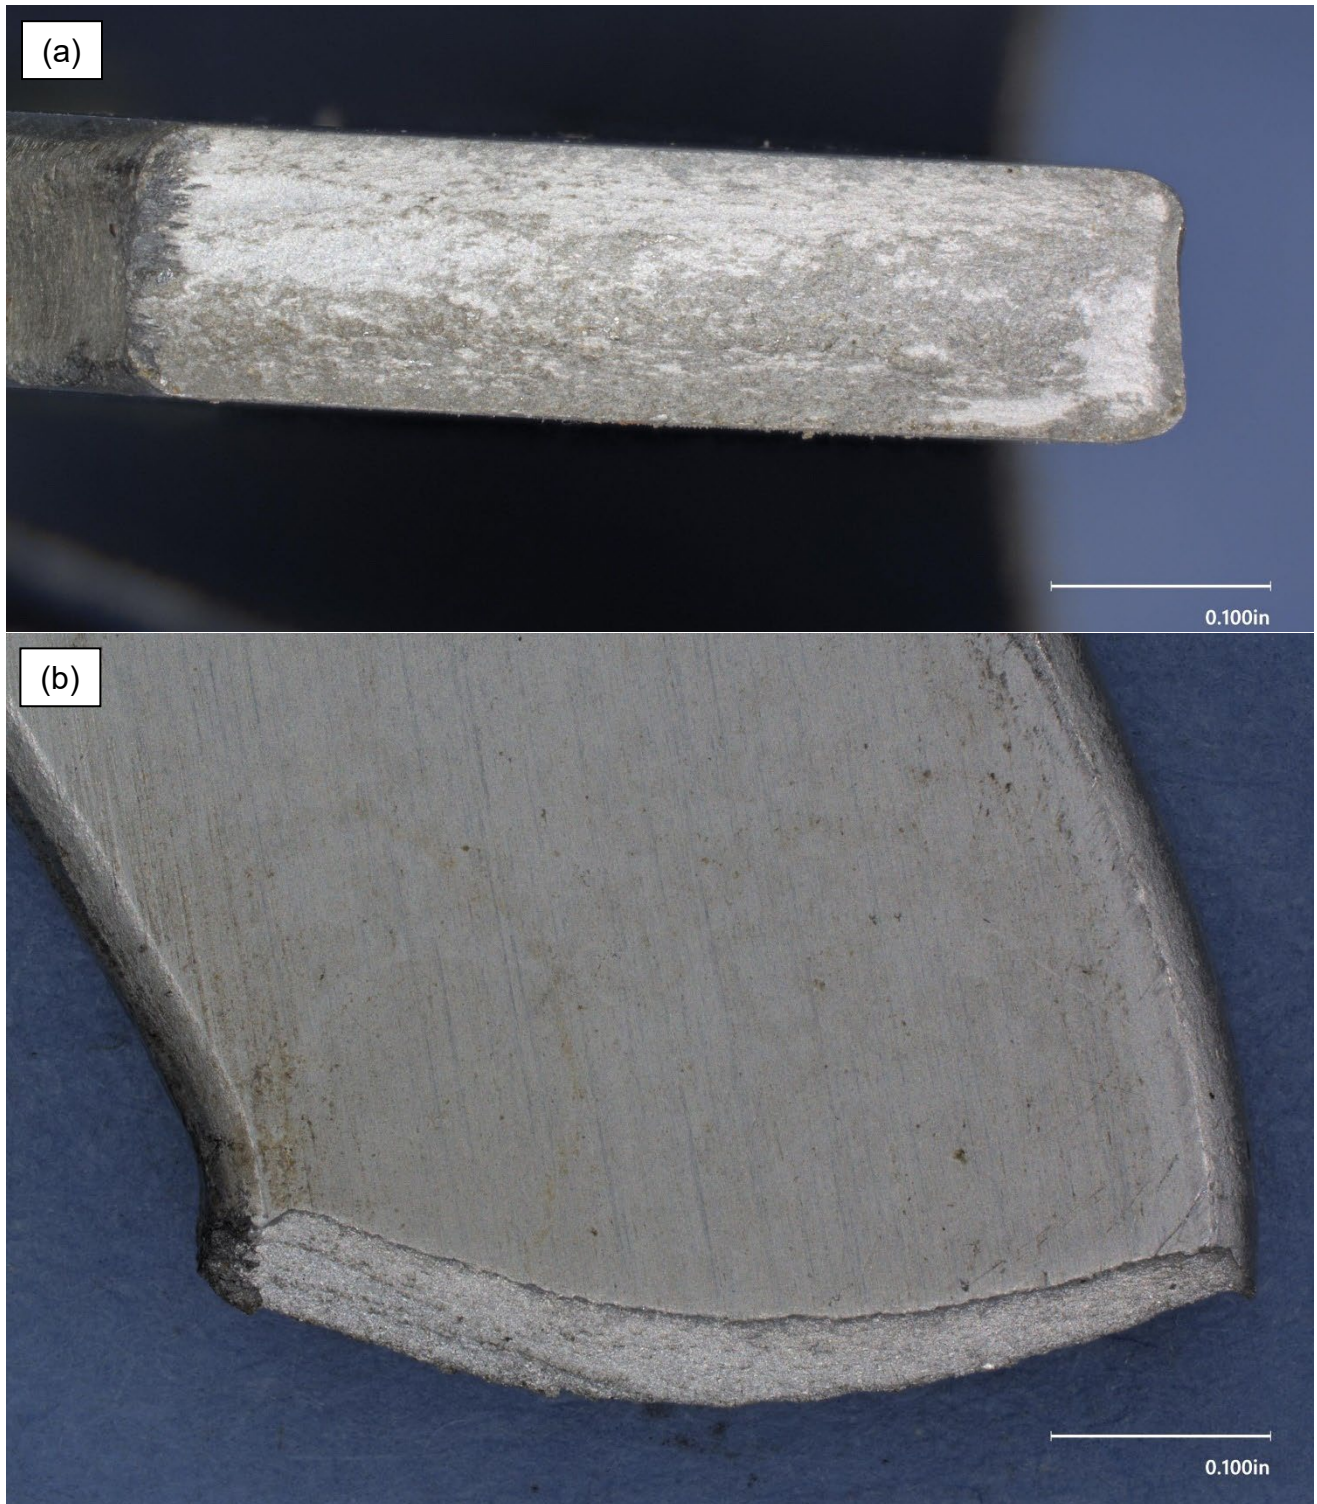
View of the B clip fracture surface on the non-riveted arm from (a) the surface and (b) the side, as received.
